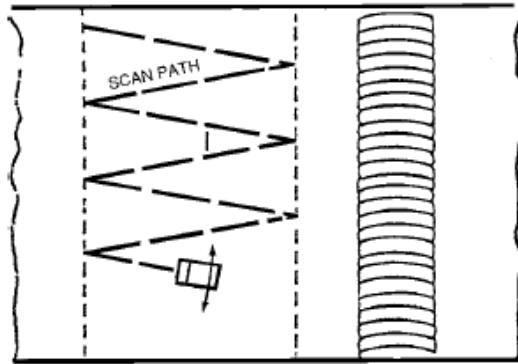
Technique 1, for Examining Butt Welds with Angle Beams (19)
